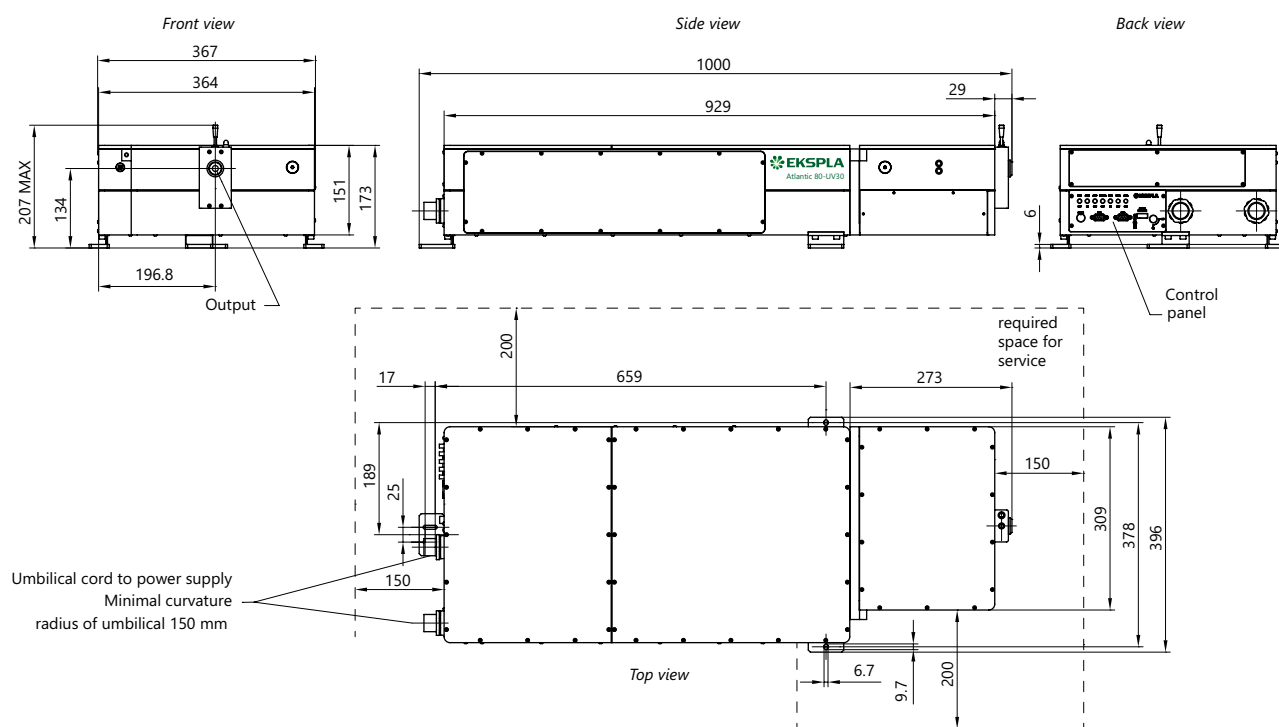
Outline drawings of Atlantic 25-UV8, 50-UV18, 80-UV30 laser head with a single 355 nm output (dimensions in mm)
